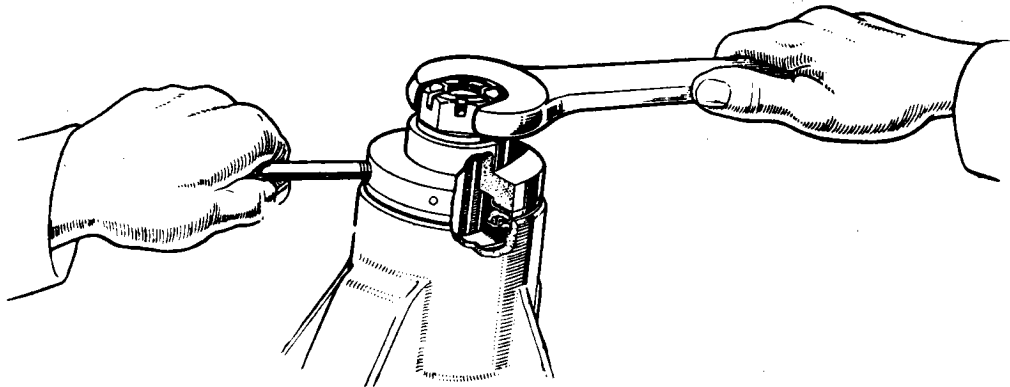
Fitting the pinion oil seal using Churchill tool SL 4 P/B
